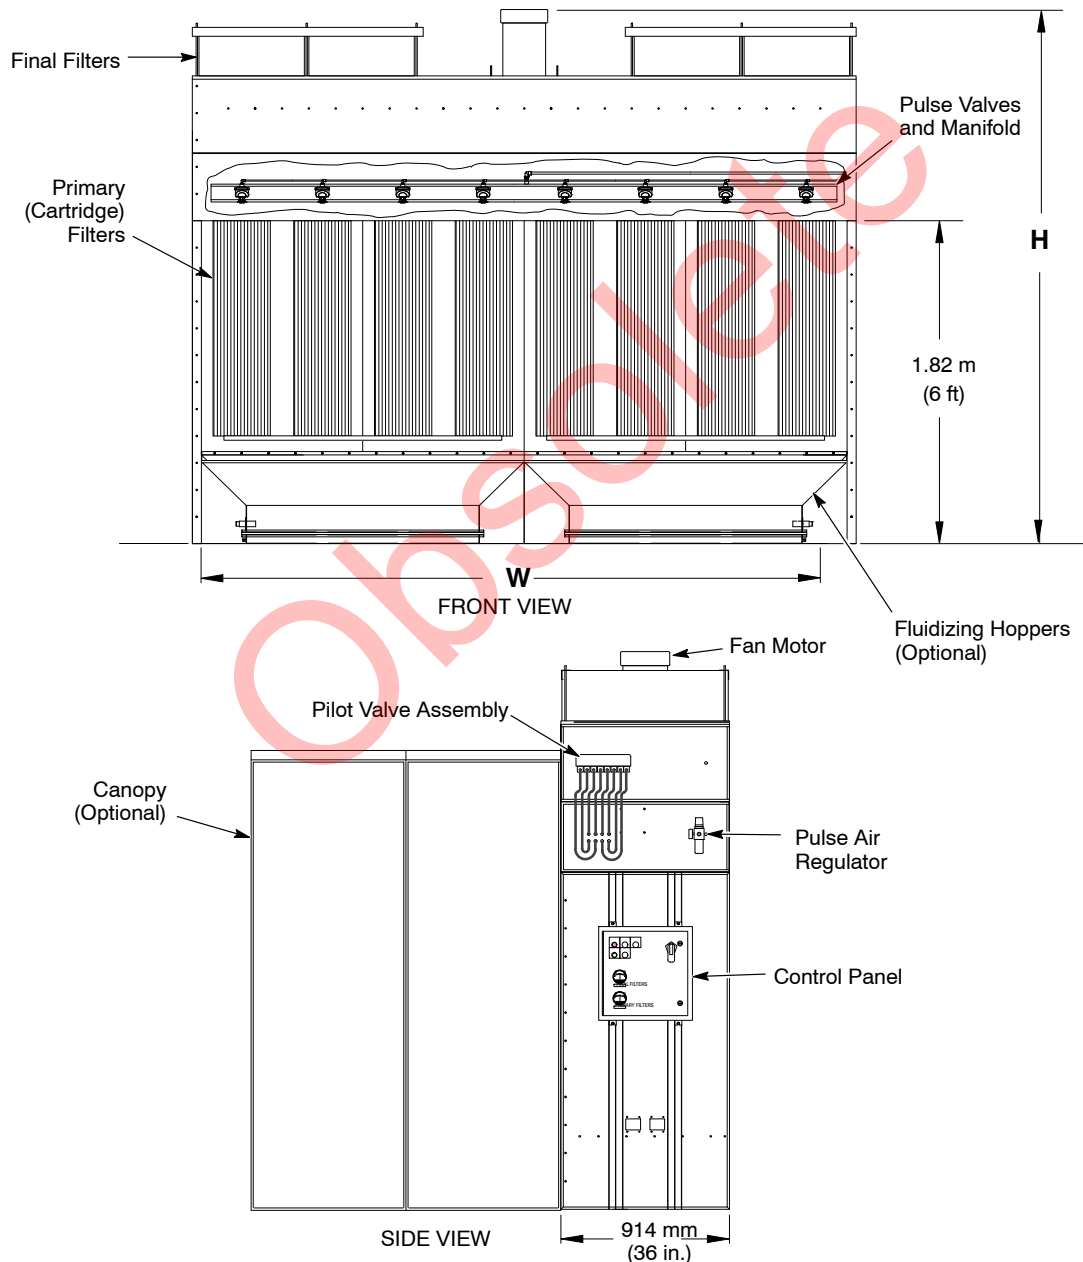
Vantage FCM Booth Components and Dimensions (10,000 CFM Collector Shown)
